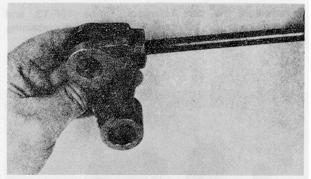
F-7. Check the Cam Follower Socket with the Push Tube
